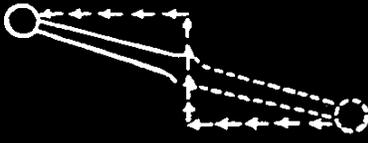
Sketch showing position of gear shifting lever when changing from first to second speed.
